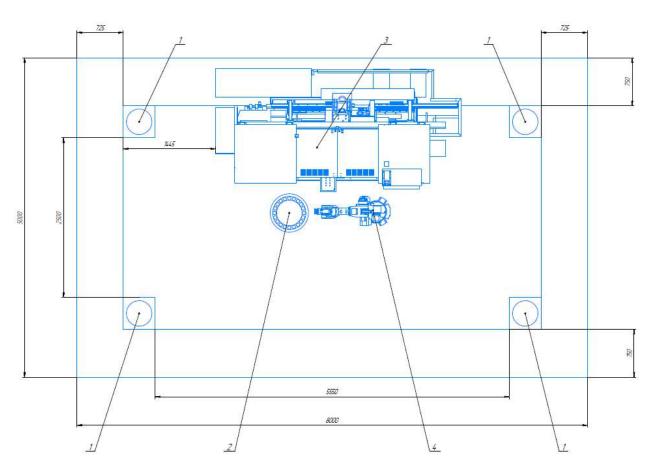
Sketch of the layout of a robotic complex for the manufacture of parts for construction 1 - columns with sensors; 2 - storage device; 3 - machine; 4 - industrial robot
